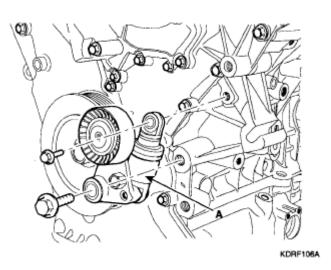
Identifying Drive Belt Auto Tensioner Courtesy of HYUNDAI MOTOR CO.
